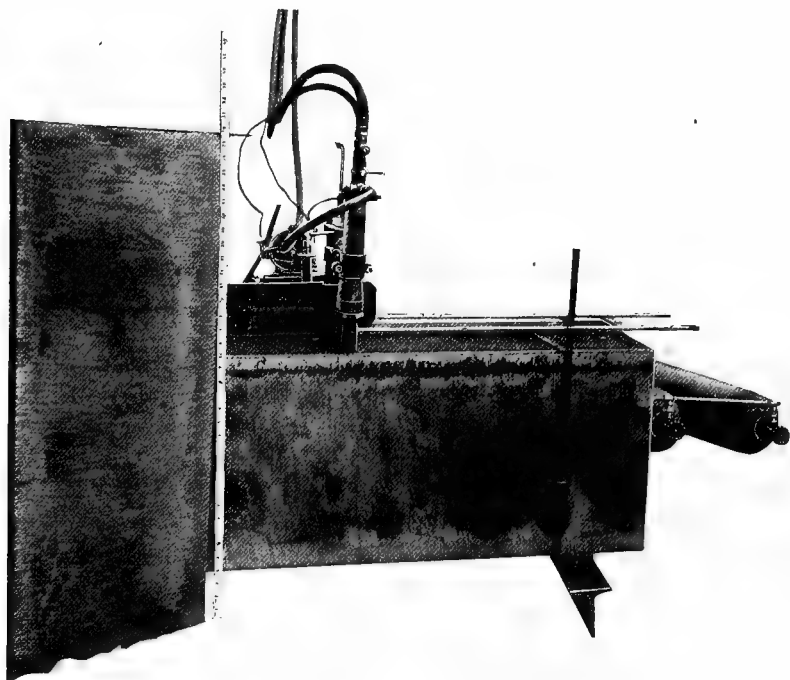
STEEL CUT WITH OXY-ACETYLENE FLAME.
